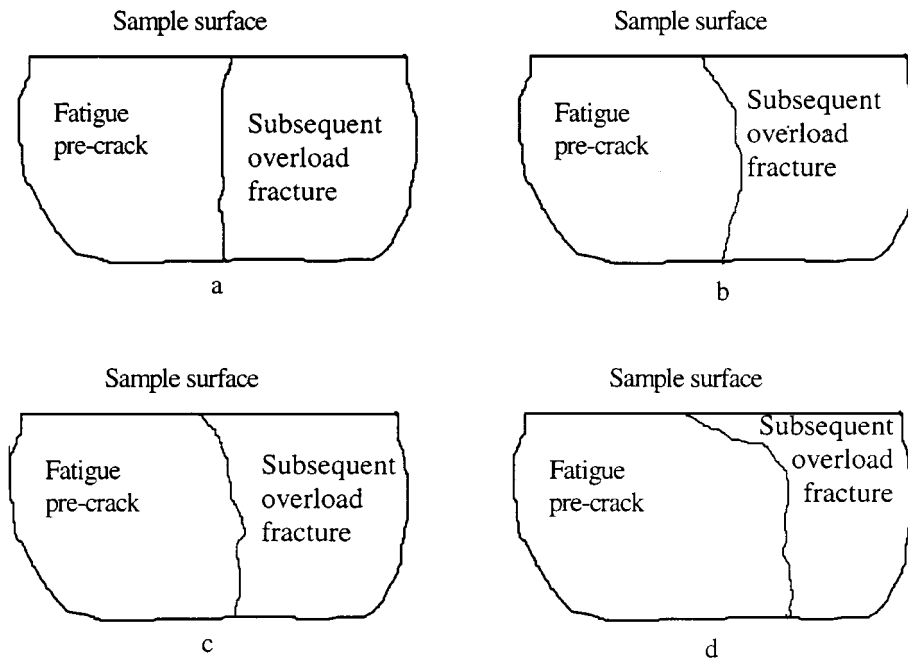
Shape of the fatigue pre-crack profile as visible on the fracture surface after breaking the specimen open after the experiments for the following values of stress intensity factor K_I (a) $35 \text{ MPa } \sqrt{\text{m}}$; (b) $25 \text{ MPa } \sqrt{\text{m}}$; (c) $20 \text{ MPa } \sqrt{\text{m}}$; (d) $15 \text{ MPa } \sqrt{\text{m}}$.
